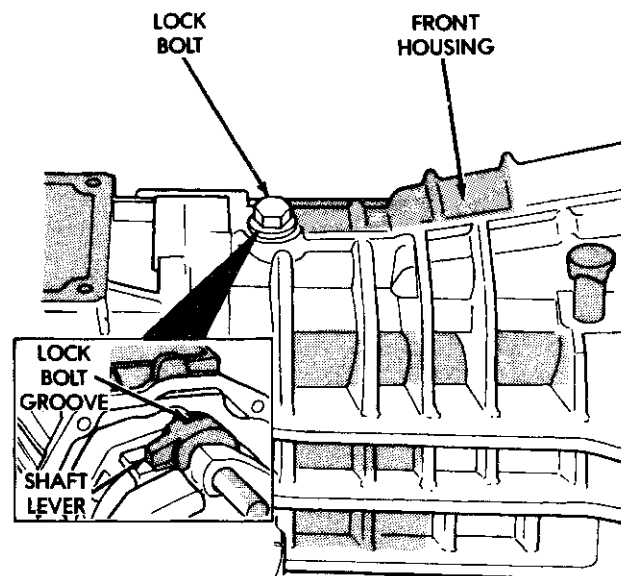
Correct Alignment Of Lock Bolt And Shaft Bushing
